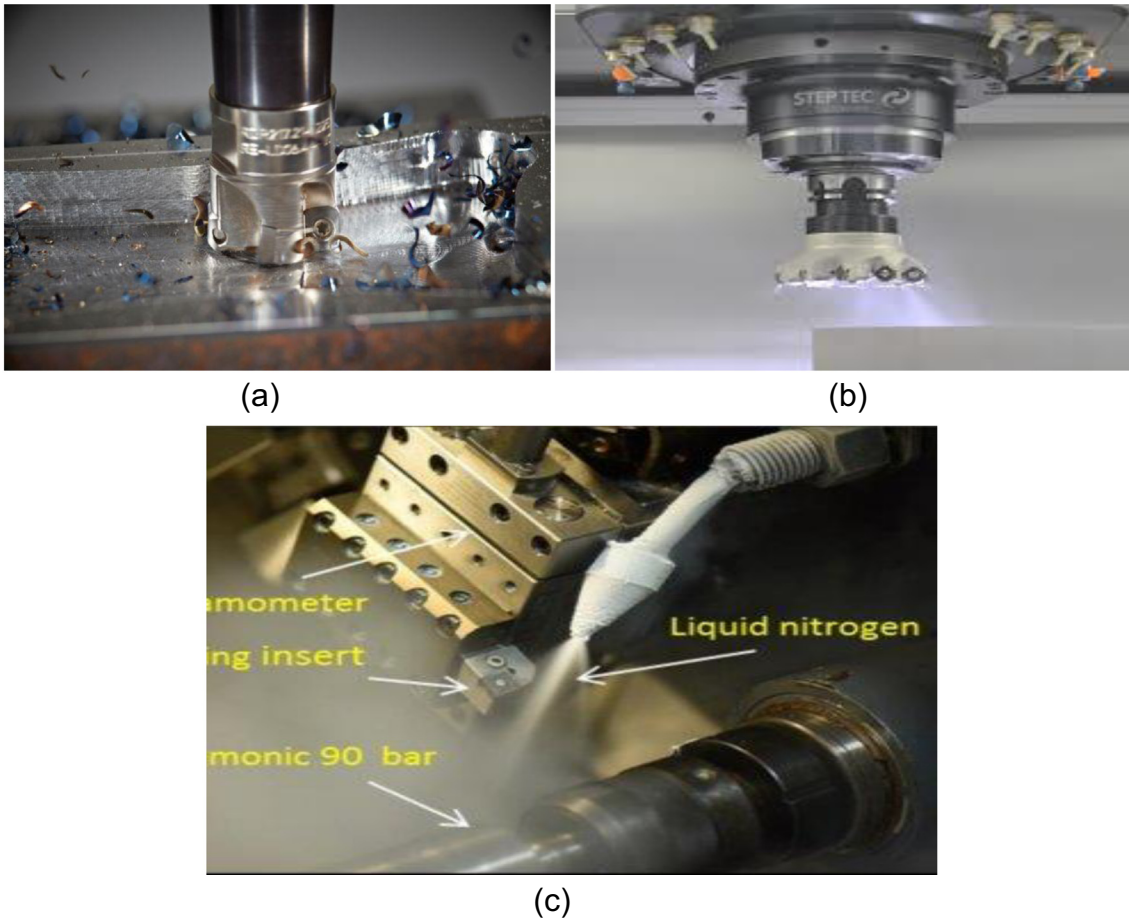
(a) Dry machining, (b) MQL machining and (c) Cryogenic Machining [14]
